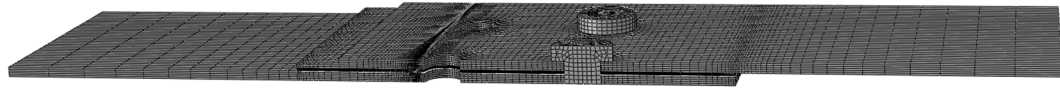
Schematic of 'Hybrid A' with the first row of rivets removed and all fastener holes still present
